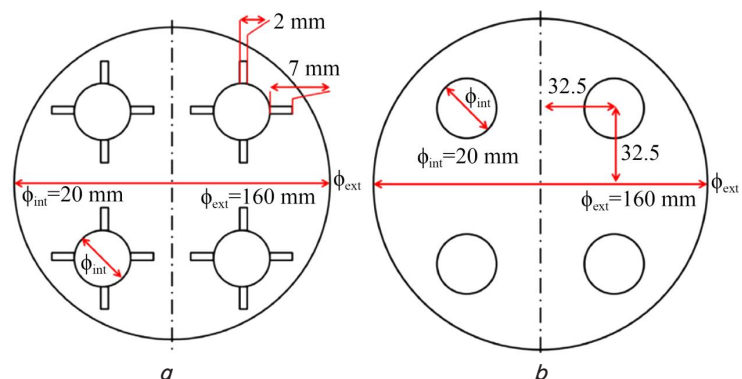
Geometry dimension: *a* – fins; *b* – holes [1]
